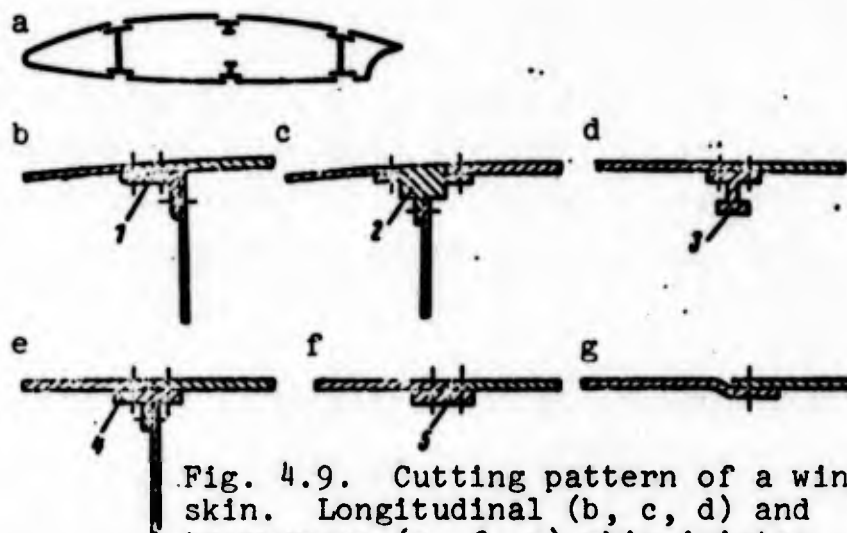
Cutting pattern of a wing skin. Longitudinal (b, c, d) and transverse (e, f, g) skin joints: 1, 2 - spar flange; 3 - stringer; 4 - rib flange; 5 - joint strip.
